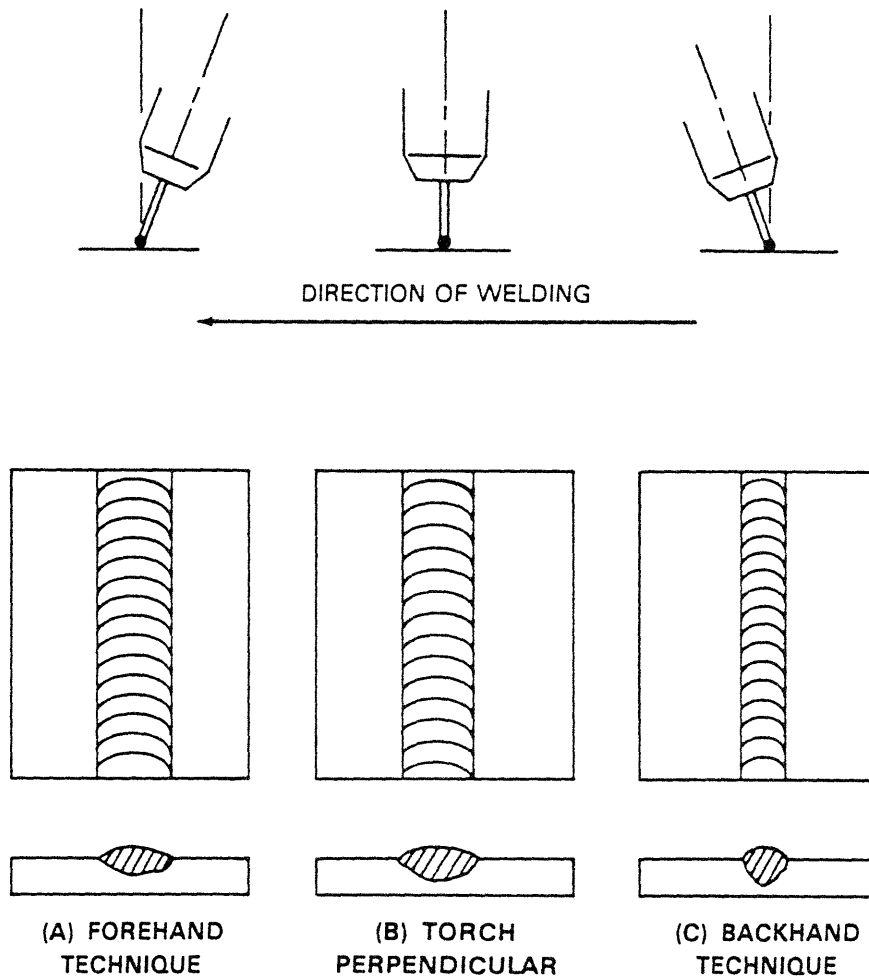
Effect of Electrode Position on Weld Geometry
